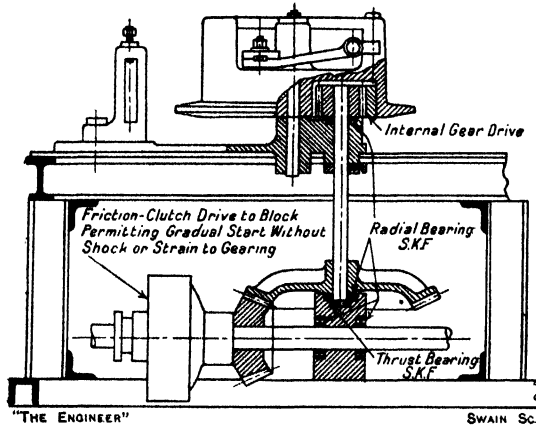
BLOCK WITH INTERNAL GEAR DRIVE—
